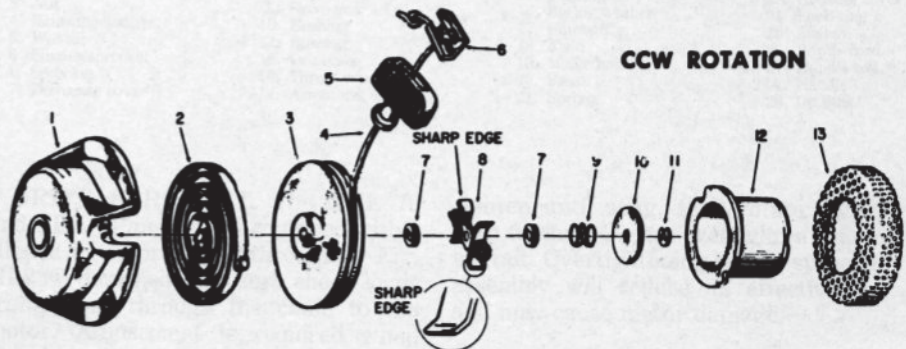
Exploded view of Fairbanks-Morse starter. Fig. HL229 shows proper method of assembling friction shoe assembly if it has been disassembled for some reason; individual parts of friction shoe assembly are not available. Note direction for shaft edges of shoes when reassembling starter.
